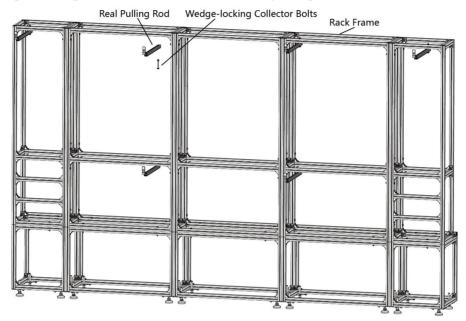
Fix the Rear Pulling Rods into the Rack Frame
